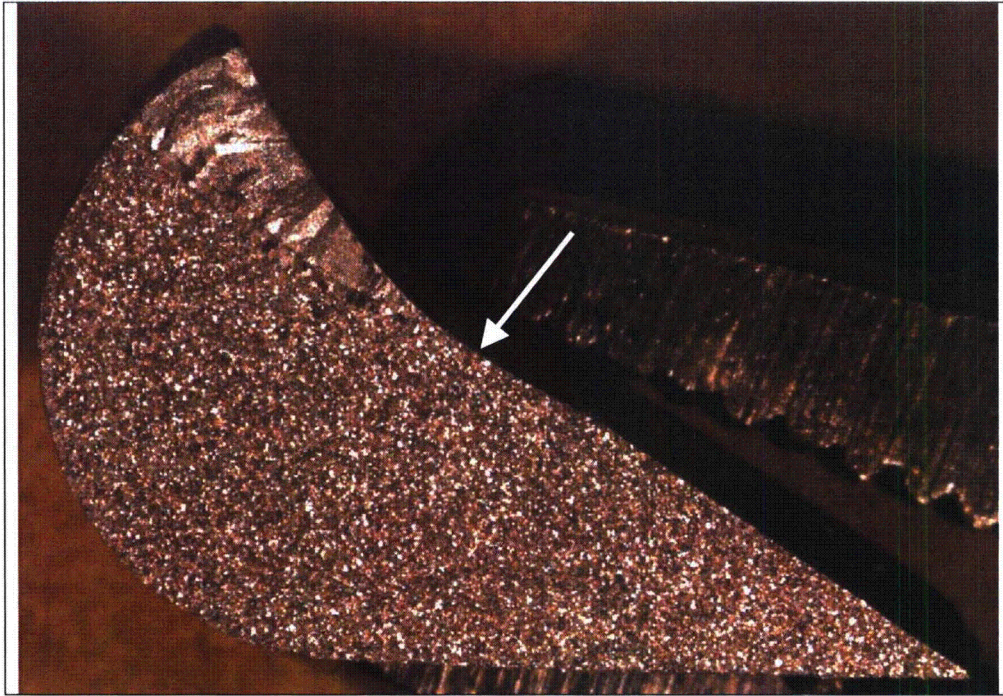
A macro-etched view of the Sample C cut face. The arrow points to the location of the weld toe on the wetted surface of the boat sample. The tube profile indicates there was minor grinding past the weld toe. (7x Magnification)
